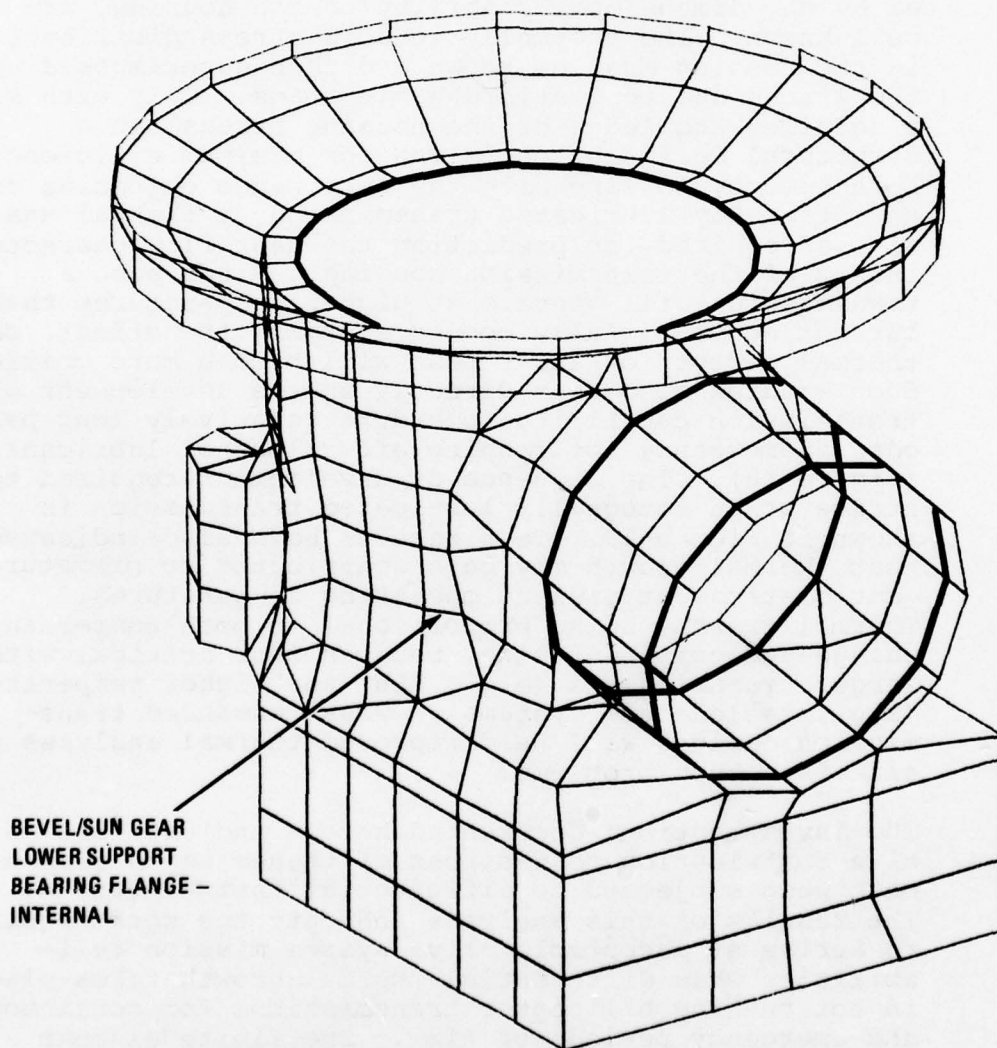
Shaded Lines Indicate Bearing Outer Race/Housing Interfaces
